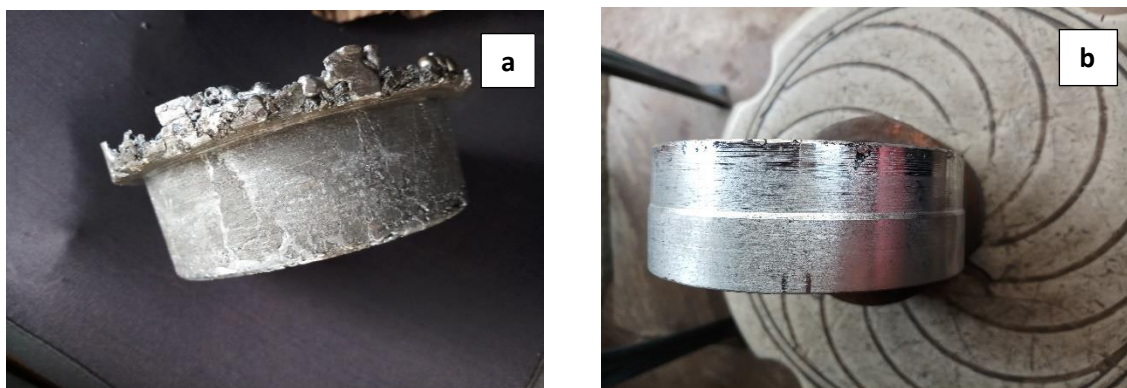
Thixcast Alloy : (a) Before Machining (b) After Machining
